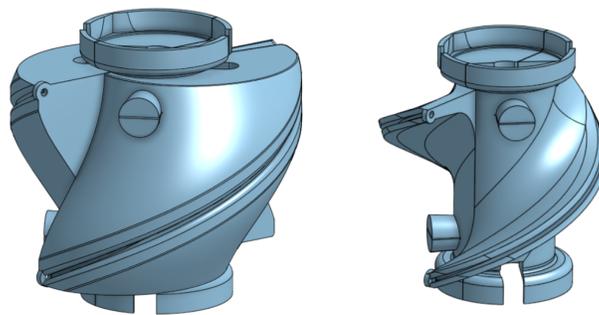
A comparison between the helical spool with the original cable guide and modified cable guide. The modified cable guide follows the spooling surface at a constant offset of 3.5mm, whereas the original guide had an offset of up to 18mm.
